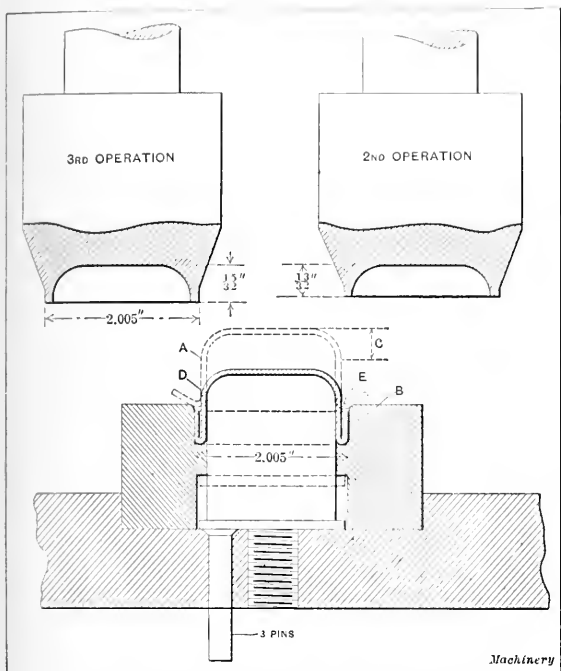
Punches and Die that proved Unsuccessful for the Drawing Operation
